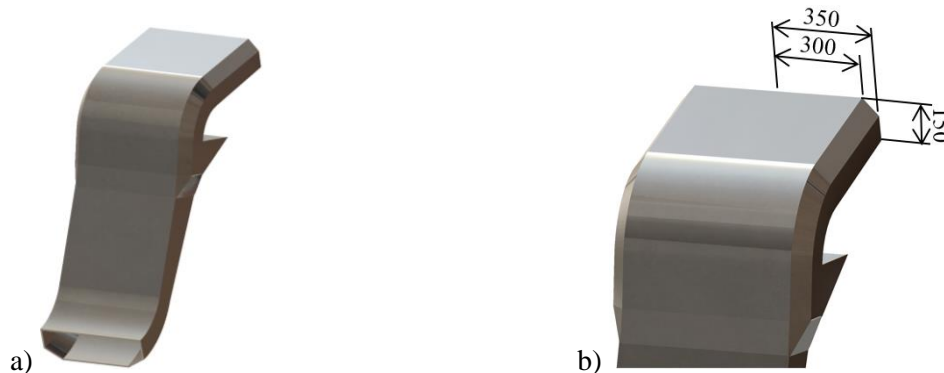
a) 3D model of the conveyor belt transfer chute; b) Dimensions of the transfer chute upper head given in millimetres [25].
